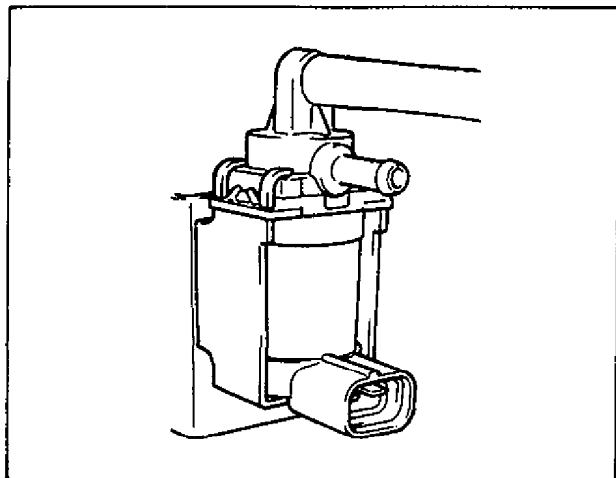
E-142 Checking ISC Solenoid Valve (1)
